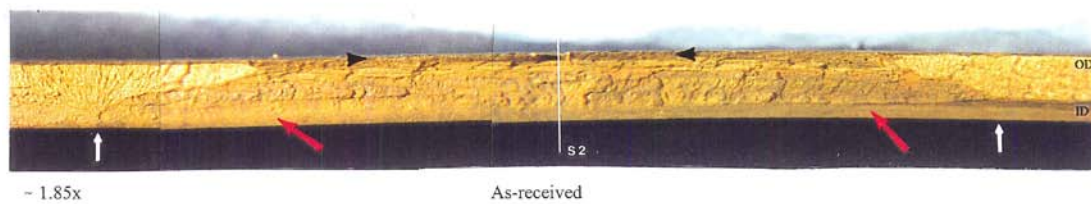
Fracture Surfaces of Fatigue Case Number 6 Anomaly
